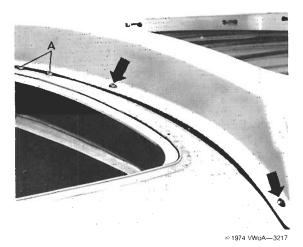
Screws at front edge of luggage rack. Arrows indicate two of the four Phillips head screws. There are two rubber spacer washers at A. Two plastic caps must be pried off for access to the two center screws.
